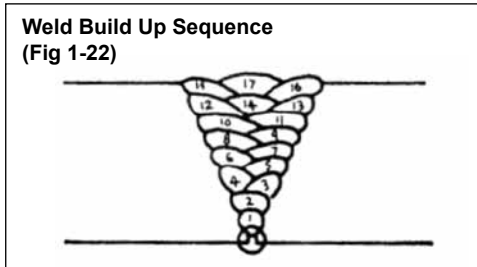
Plates thicker than 6.0mm should have their mating edges bevelled to form a 70° to 90° included angle. This allows full penetration of the weld metal to the root. Using a 3.2mm E7014 Stick electrode at 100 amps, deposit a run of weld metal on the bottom of the joint.
